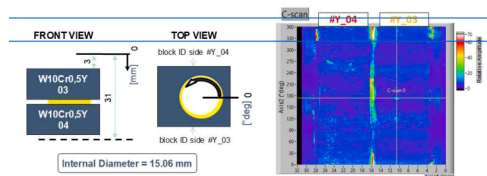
Blocks #Y_03 and #Y_04 after OFHC-Cu casting and UT C-scan in the Cu interlayer with bore hole machined to 15.06 mm.
